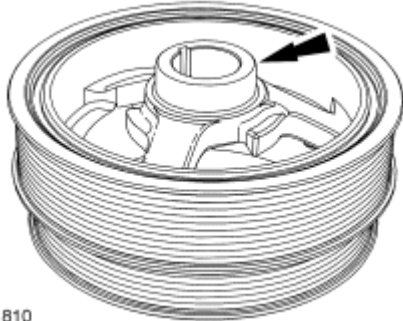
Applying Silicone Gasket & Sealant To Woodruff Key Slot On Crankshaft Pulley
